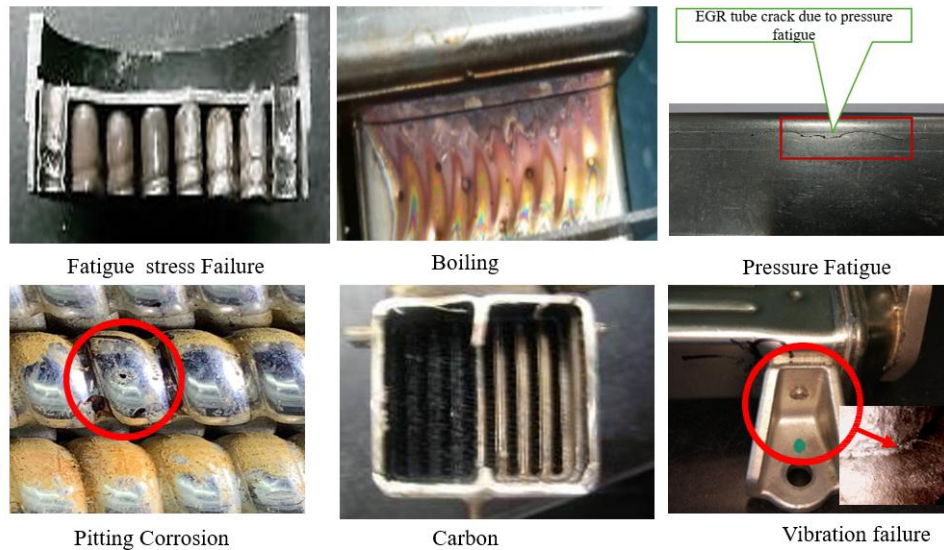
EGR cooler has different failure modes, e.g., thermal fatigue, boiling, vibration, pressure fatigue, and pitting corrosion.
